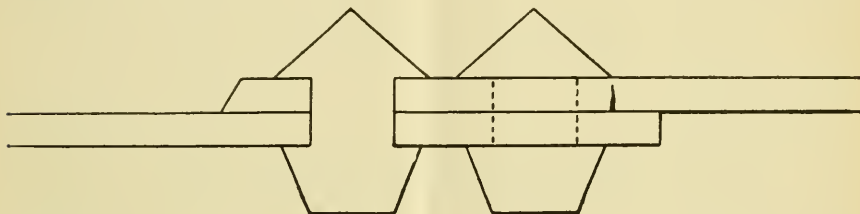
A LAP JOINT CRACK UNDER THE OUTER EDGE OF THE RIVET HEADS.
